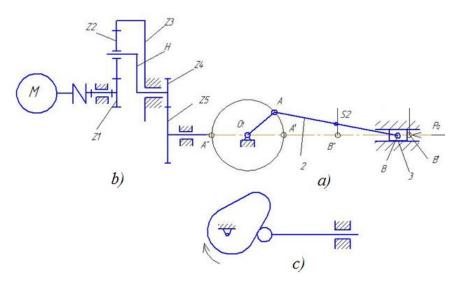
Kinematic diagram of the mechanisms of the horizontal-oval machine: a) gearbox, b) crank-slider mechanism, c) cam mechanism
